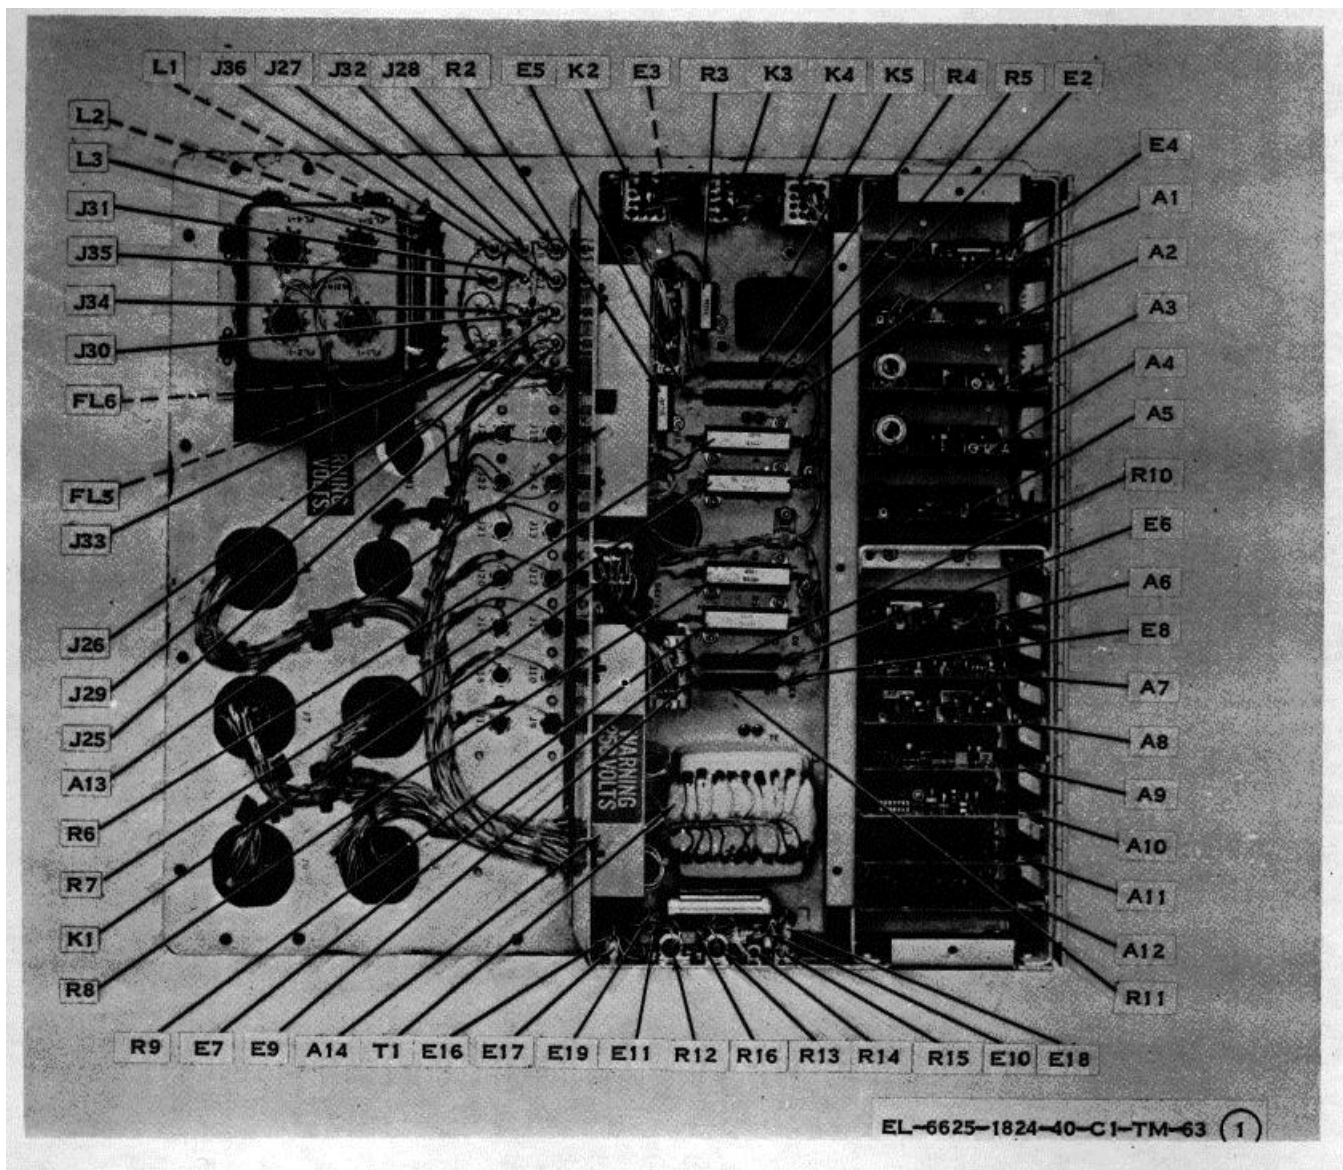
(1). Parts location, control unit 1A1 (part 1 of 2)
